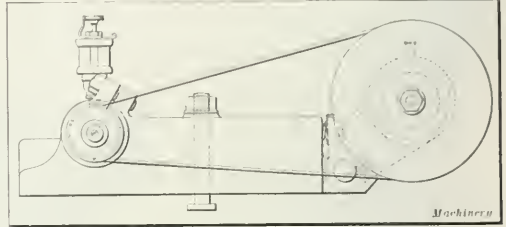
Drive from Countershaft to Wheel-spindle and Method of adjusting Belt Tension
